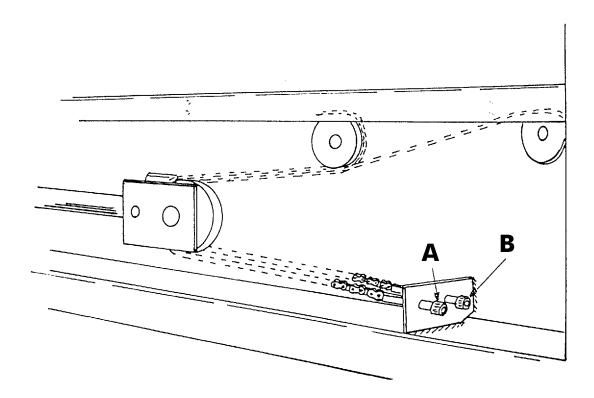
TABLE HEIGHT ADJUSTING DETAIL
